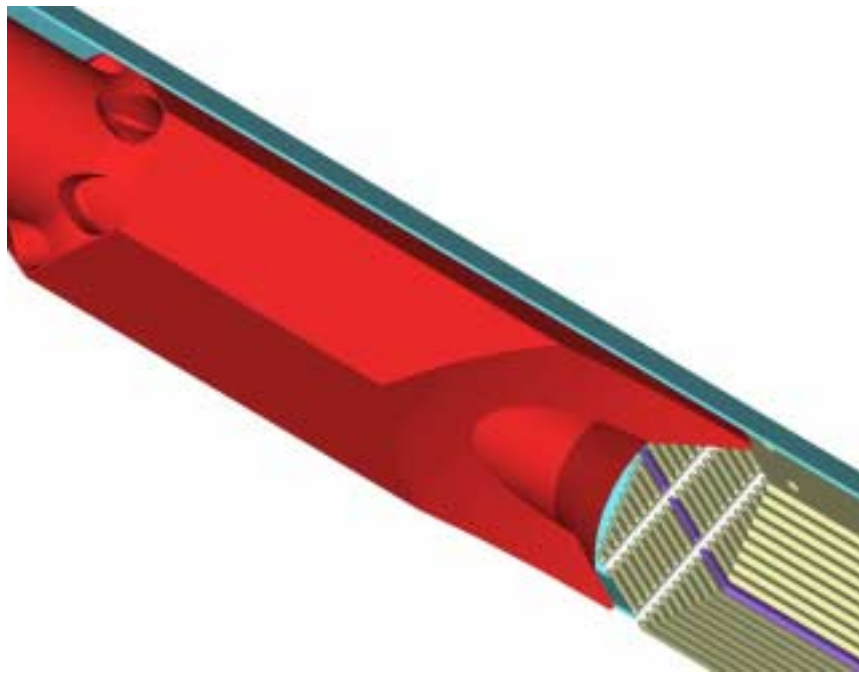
A section of the tungsten target design concept for the inclined beam entry showing the tungsten plate arrangement and the reflector integration with target design
